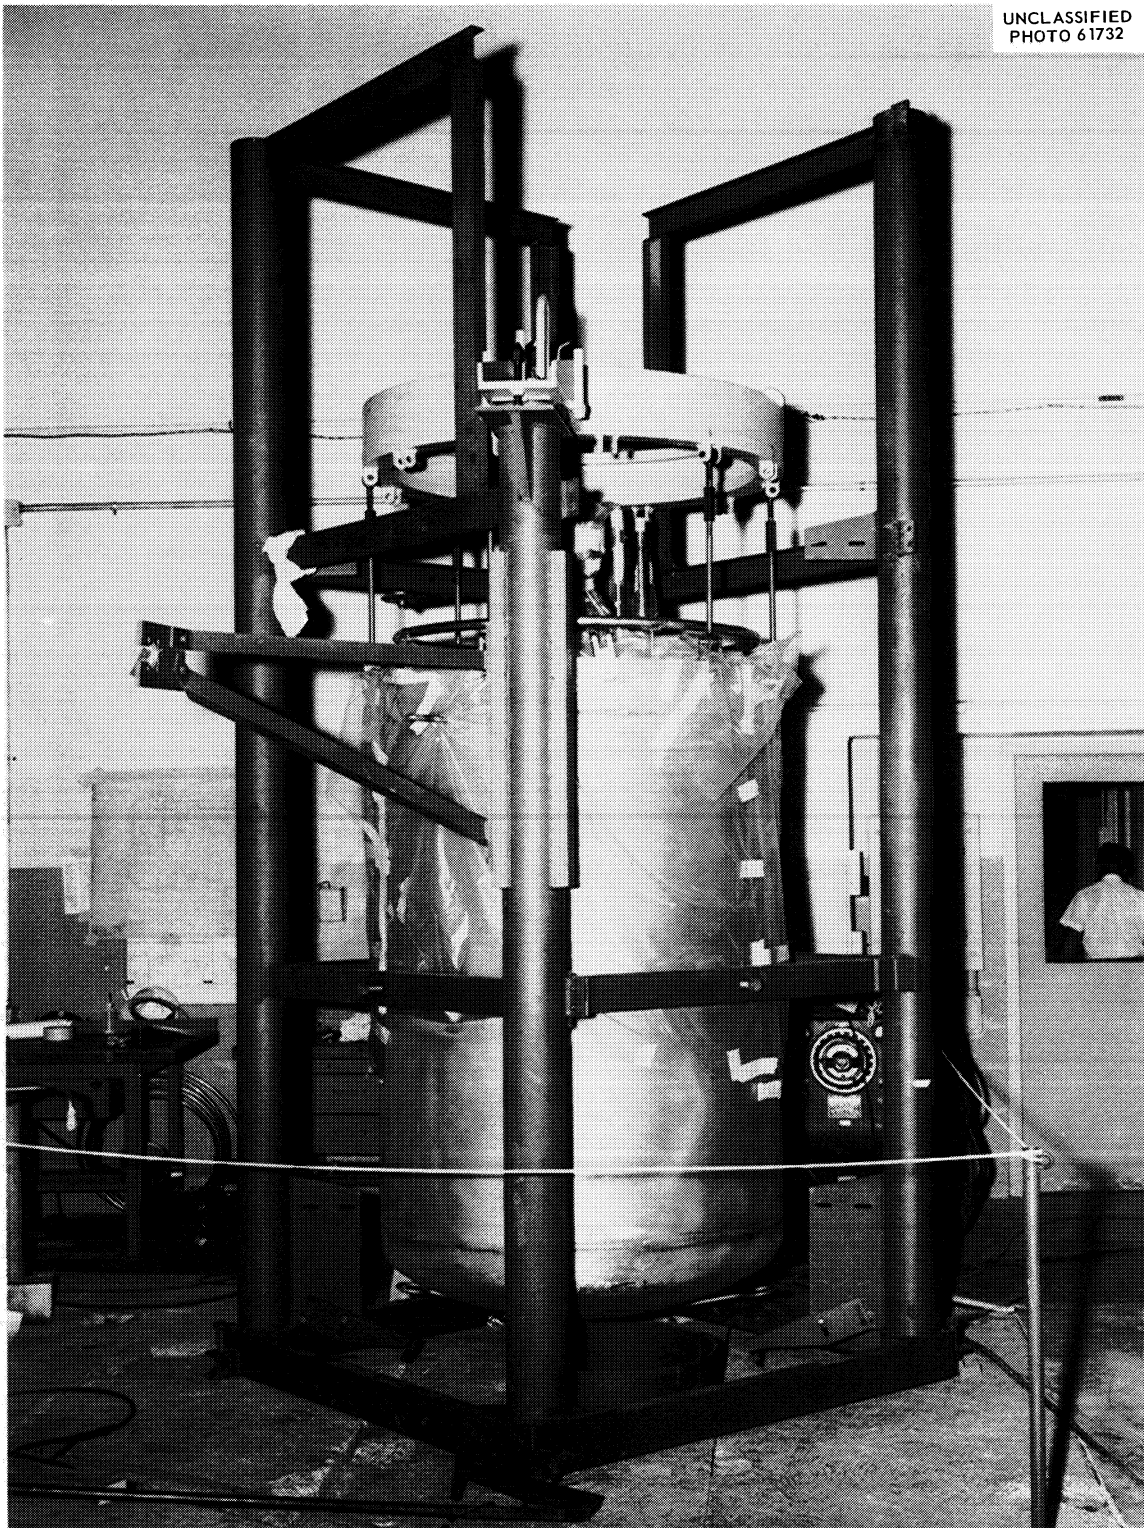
Coolant Drain Tank Assembled on Locating Jig.
